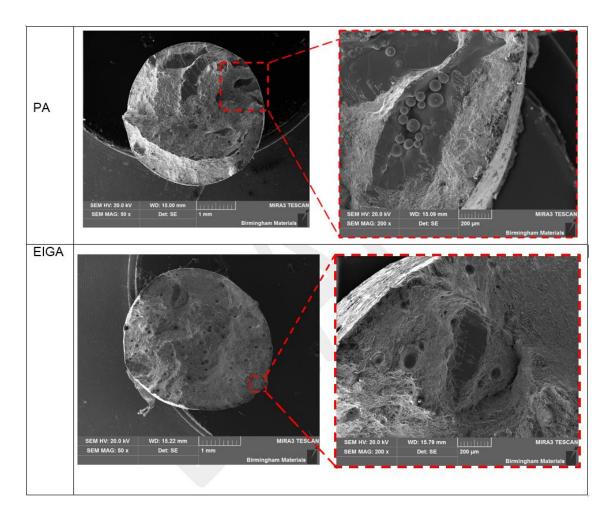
Fracture analysis of as-built test specimens PA samples with lack of fusion defects and while spherical pores for EIGA pores
